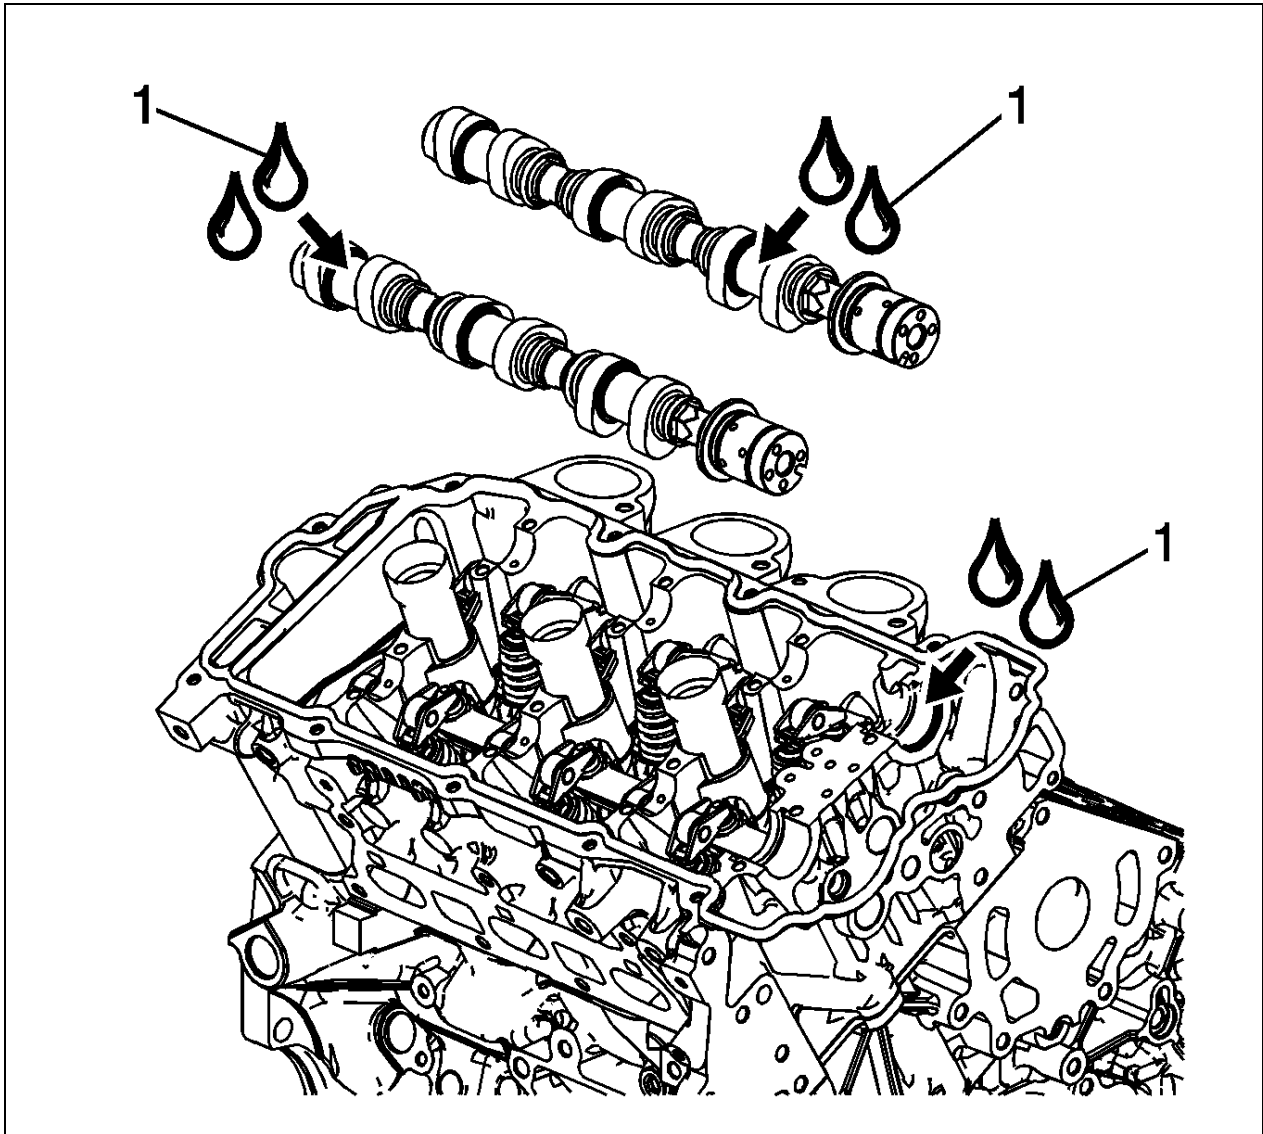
Locating Camshaft Sealing Rings In Camshaft Grooves
